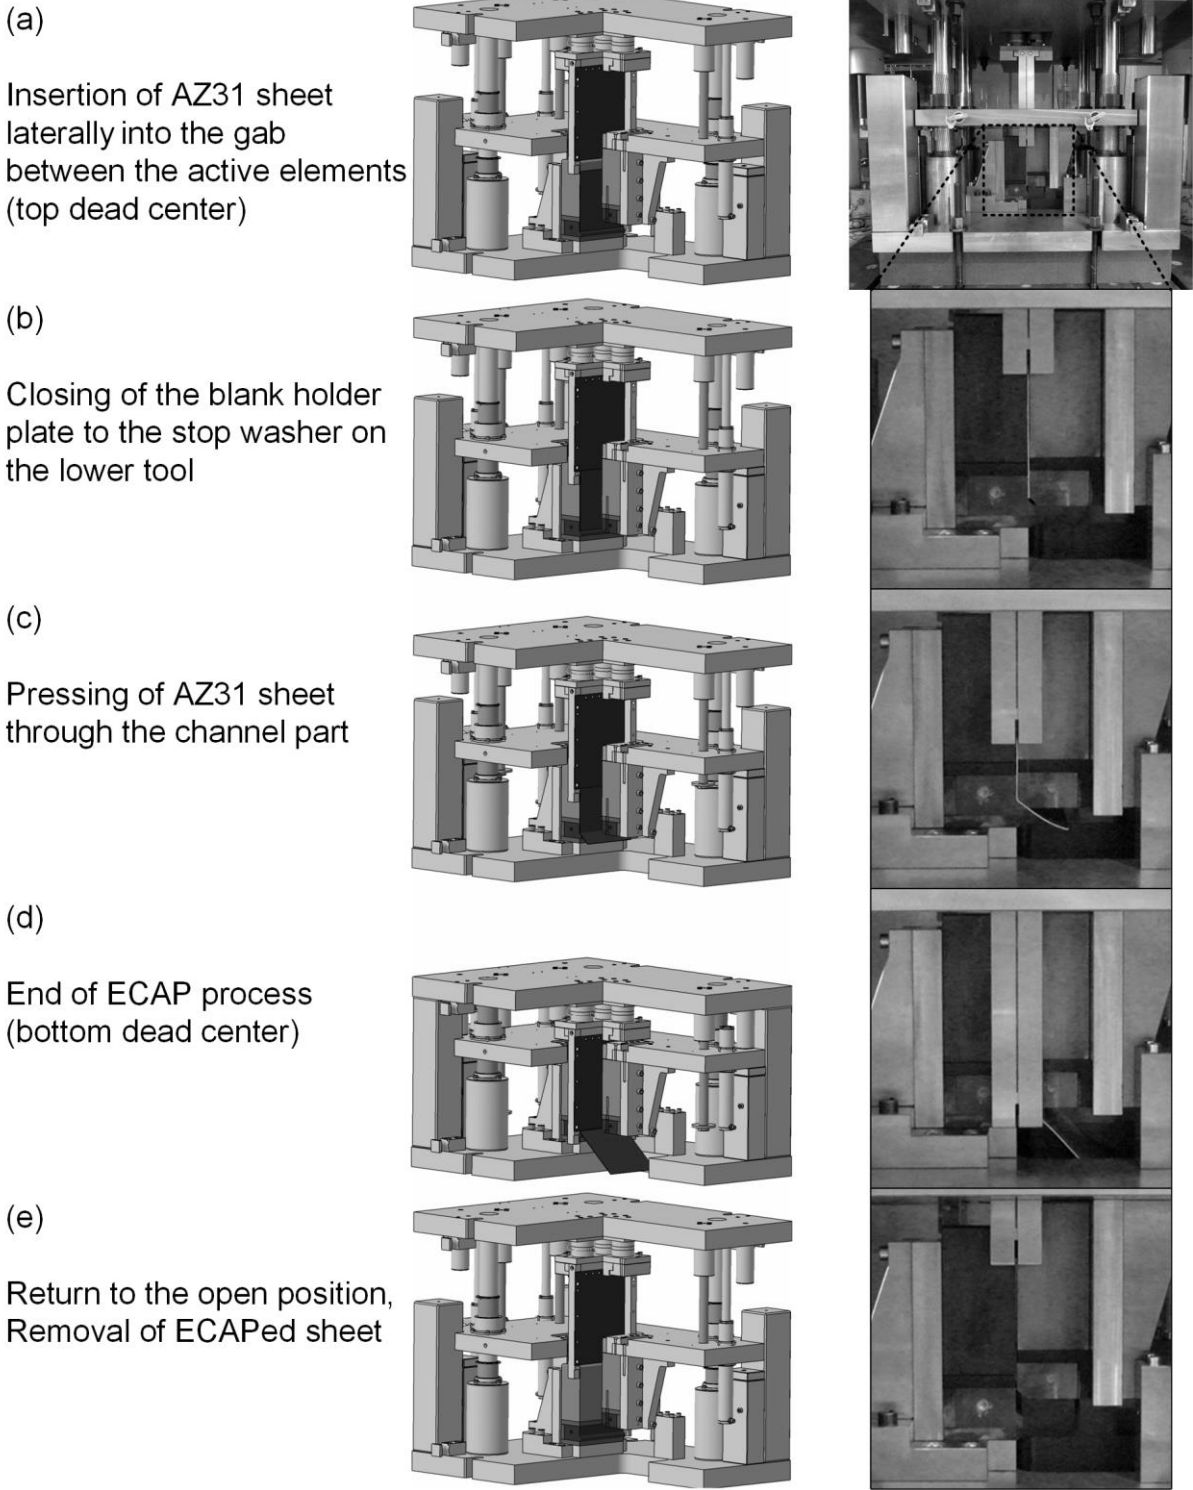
Kinematics of ECAP tool: (a) top dead center, (b) closing of blank holder plate, (c) pressing, (d) bottom dead center, (e) tool open for sheet removal
